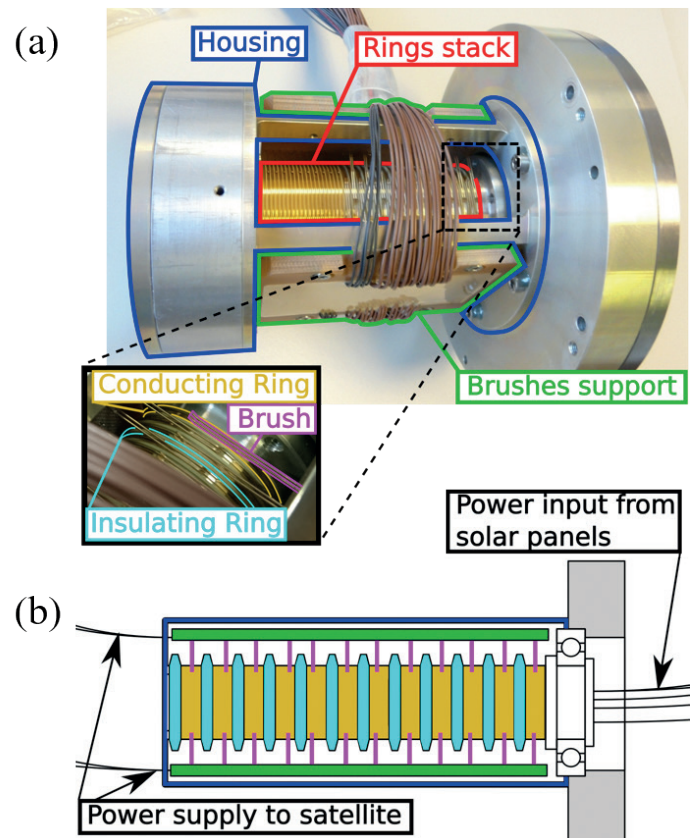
(a) Photograph of a cylindrical slip ring [7]. The conducting housing is partially removed to show the slip ring components such as brushes, and conducting and insulating rings. (b) Schematic of the slip ring with the colours of the components corresponding to the labels in (a).
